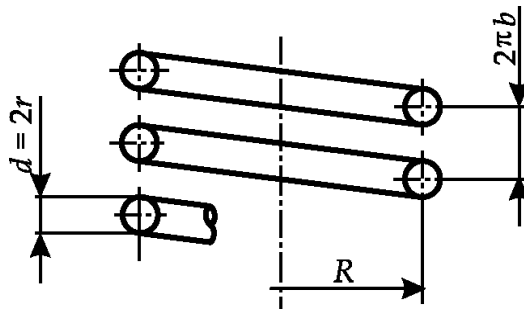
Schematic representation of a helical pipe with its main geometrical parameters:  $r$  - tube radius;  $R$  - coil radius;  $2\pi b$  - coil pitch
